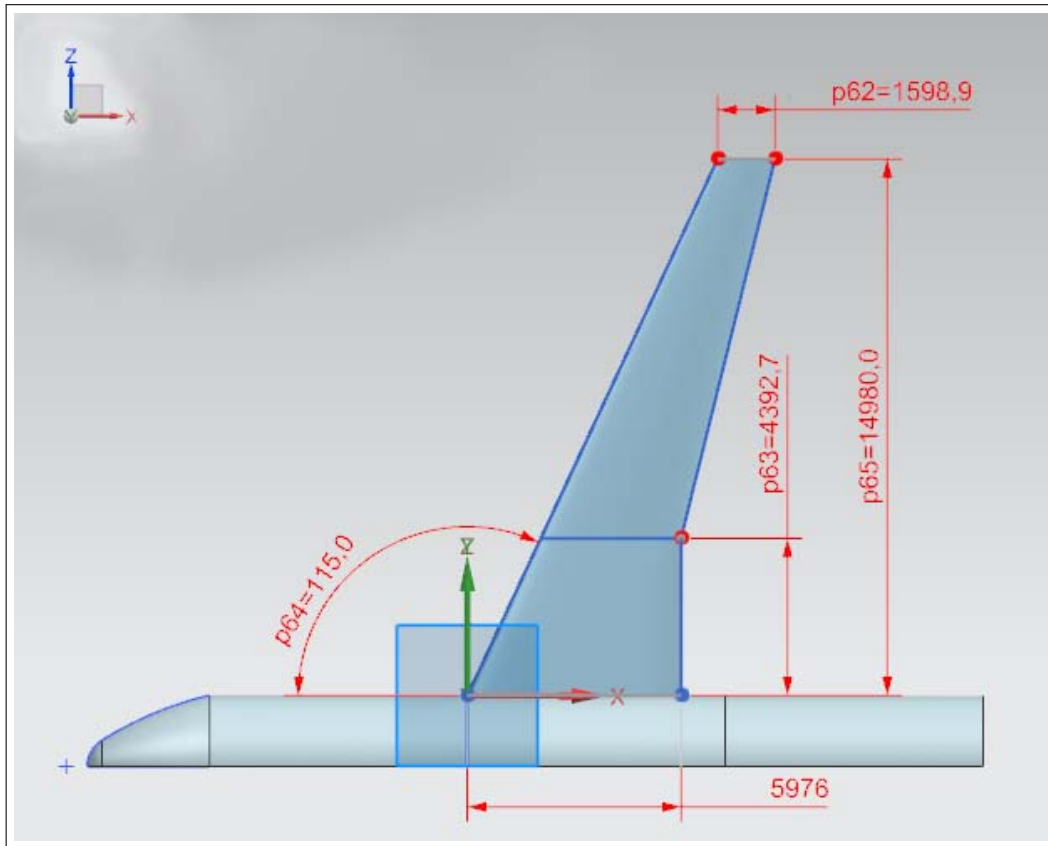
3D CAD model - wing dimensions for no-winglet case (mm)
